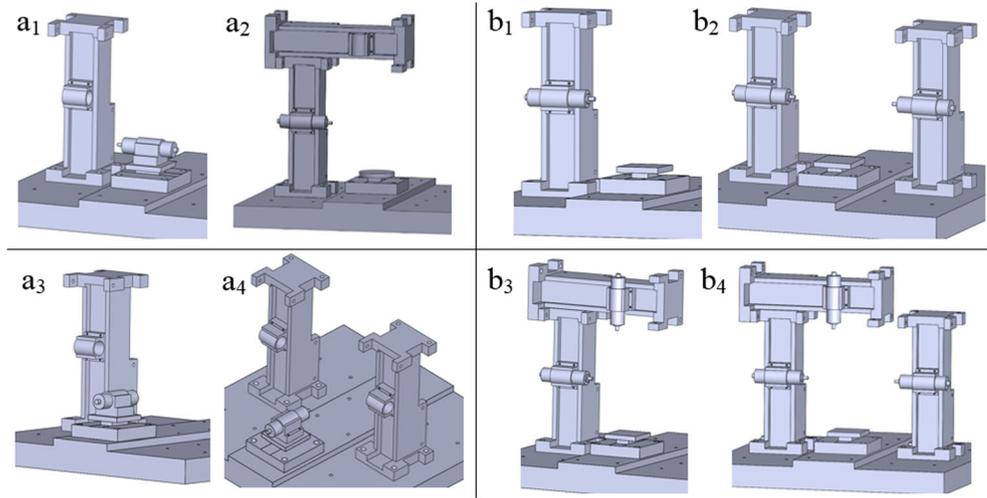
Scalability of RMS with CNC machine tools and RMT
